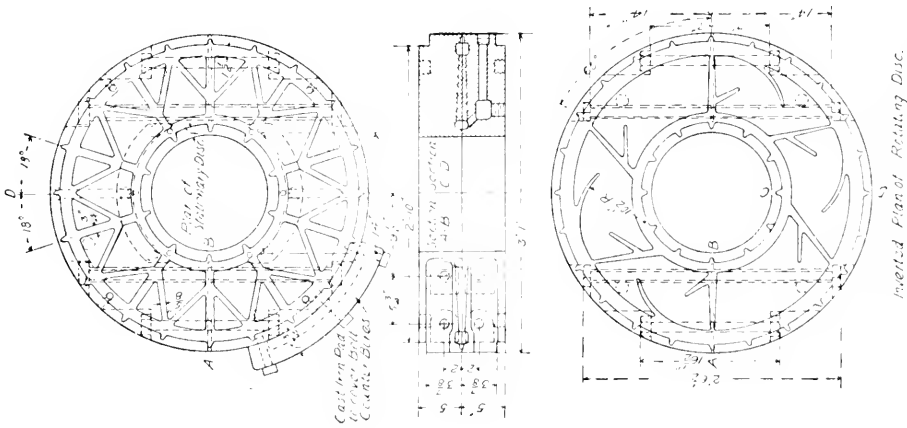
Oil-Grooves in Thrust-Bearing Discs.
